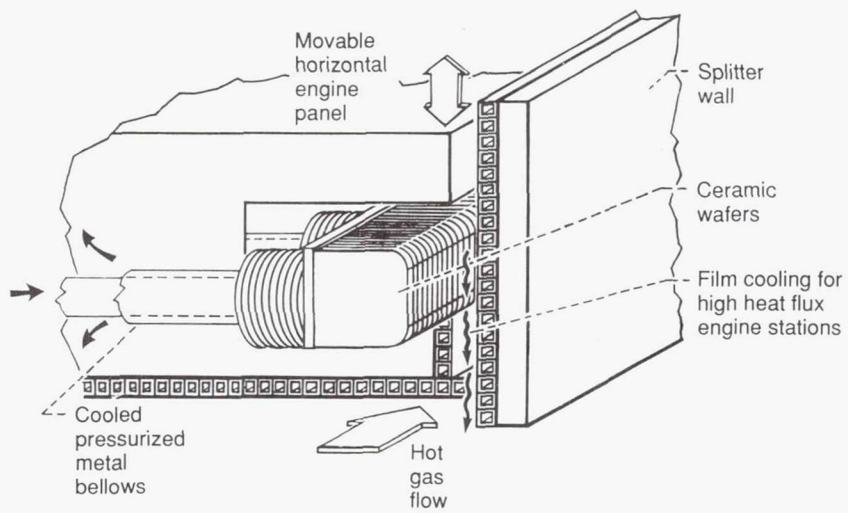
Isometric of ceramic wafer seal installed in the movable engine panel.
